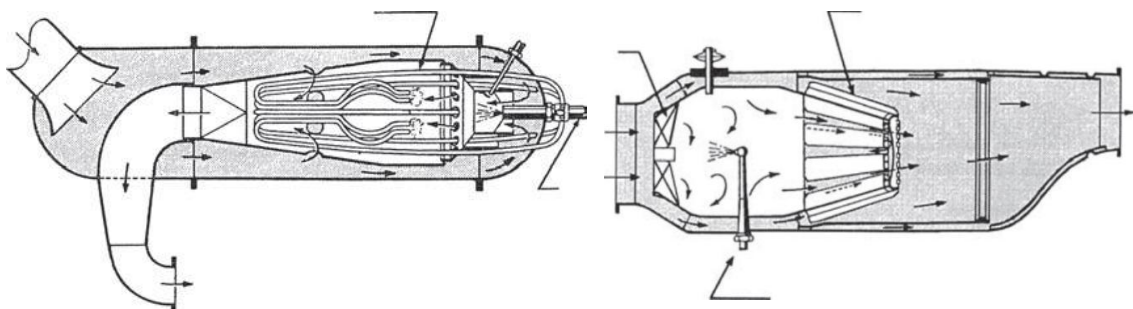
To the left Frank Whittle's combustor, to the right combustor of JUMO 004 engine [5]
